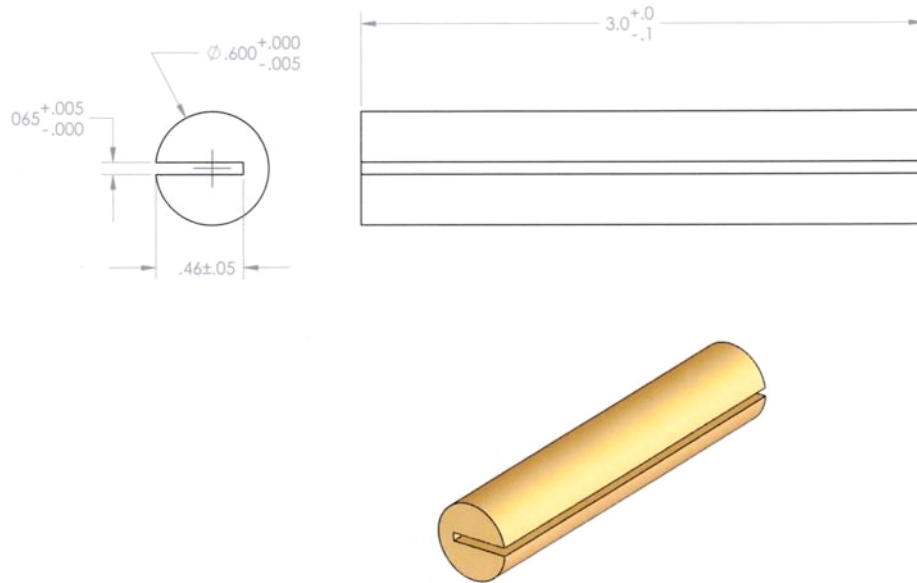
Drawing of Shaft Insert with Dimensions in Inches.
